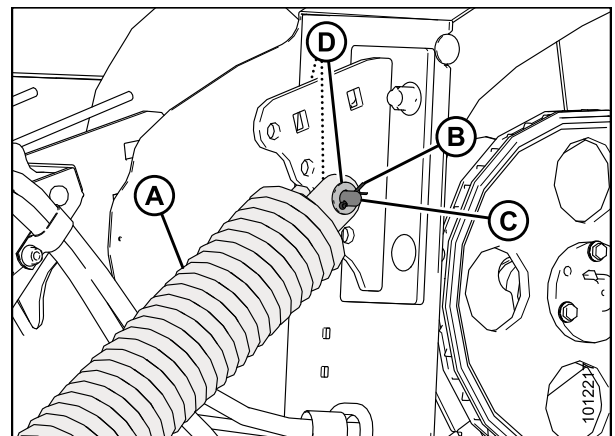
Left Side Spring Float Assembly Shown – Right Side Opposite
